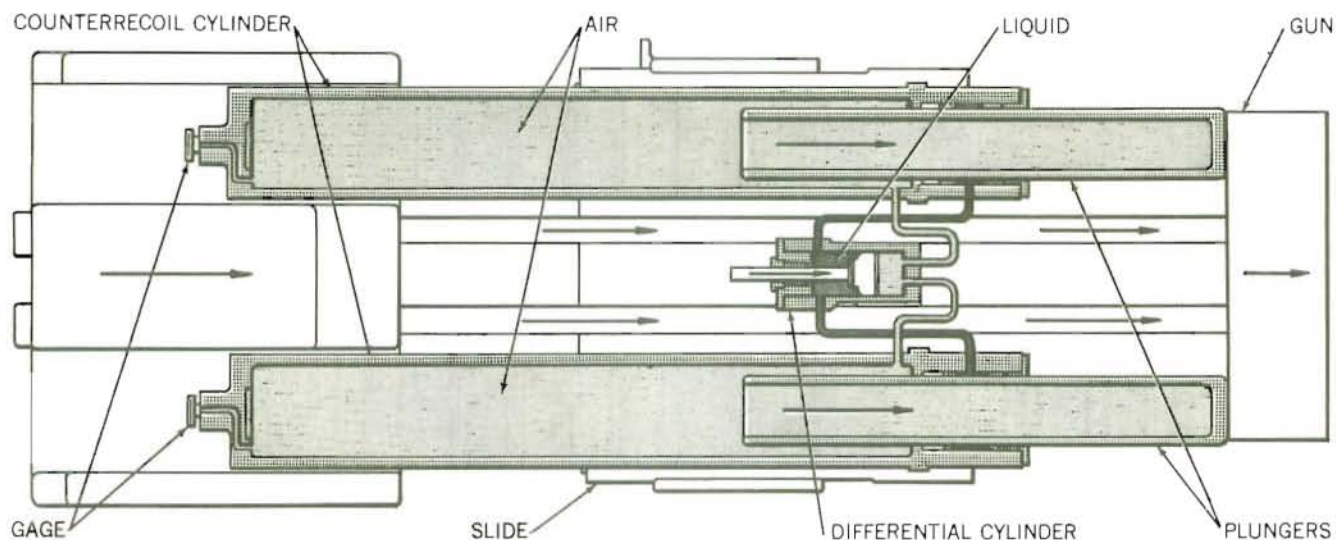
C. 16-inch Gun Assemblies. Counterrecoil Action.
